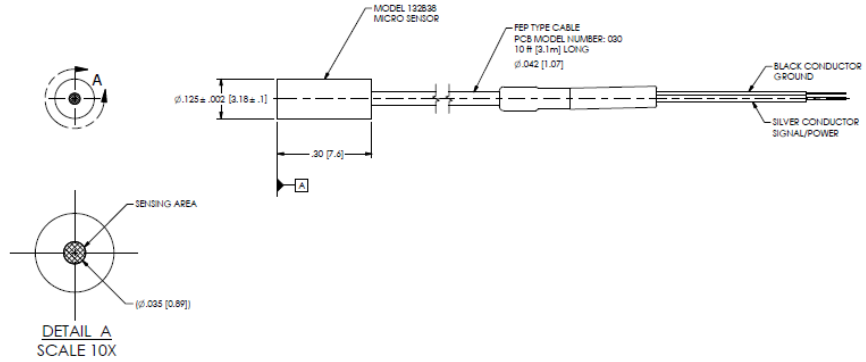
Technical drawing of PCB Model 132B38 pressure sensor.
